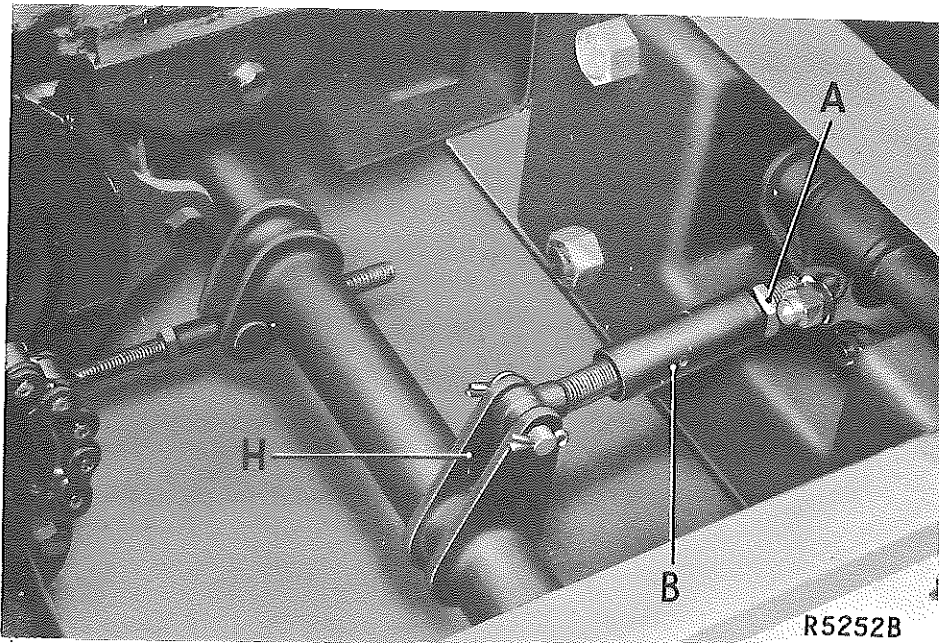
ARRANGEMENT OF BRAKE GEAR
